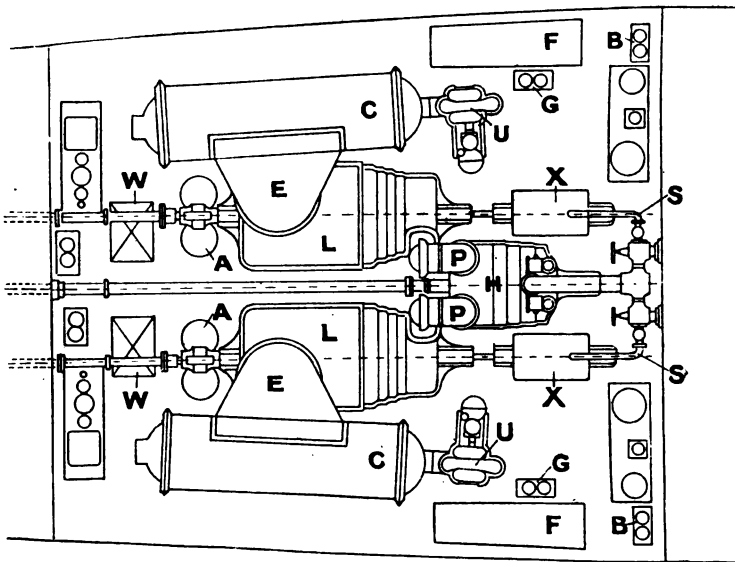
Arrangement of machinery on turbine-propelled vessel.
